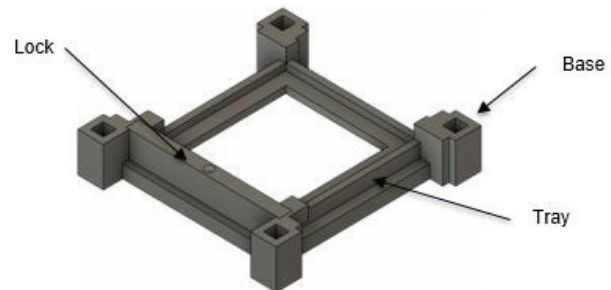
Snapshot of 3D model of the specimen holding platform.
